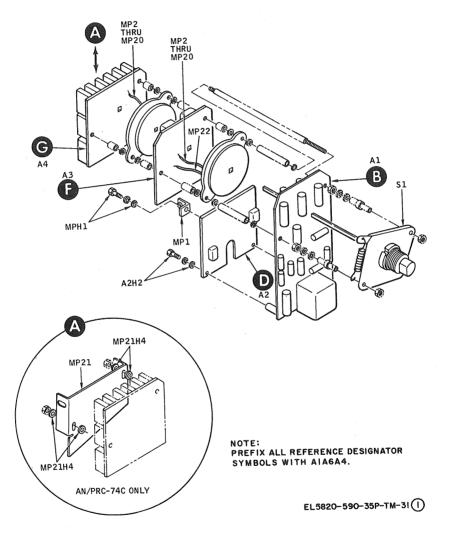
Frequency synthesizer module, switch A4 disassembly.
